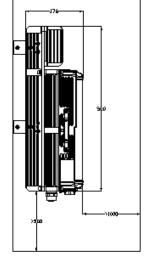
SPACE REQUIREMENT FOR WALL-MOUNT INSTALLATION (UNIT: MM)
